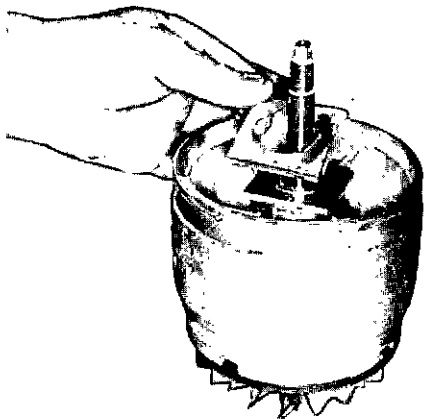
, (VTST30). Removing the turbocharger bearing insert
